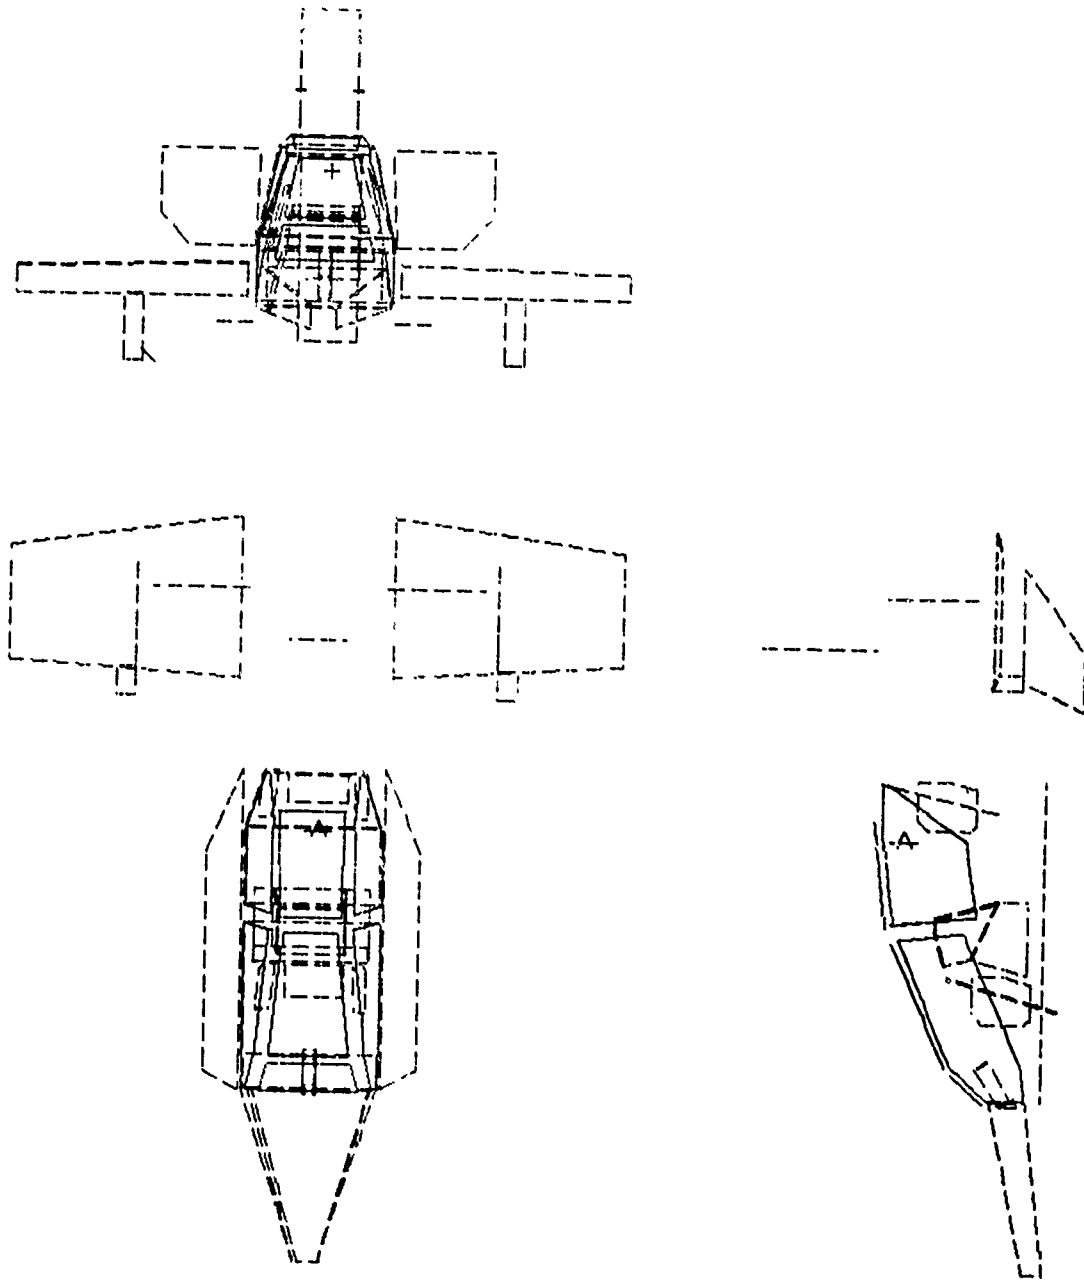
Top, side and front views of canopy frame and obstructing surfaces.
